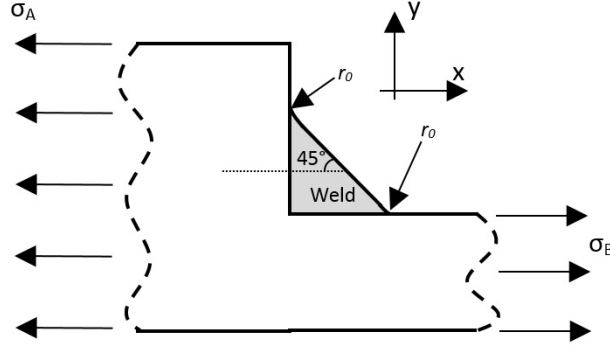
Notch stress approach to a fillet weld. The weld toe radii are defined with a magnitude  $r_0 = 1$  mm. The maximum principal stress of this model is retrieved for fatigue life calculations.
